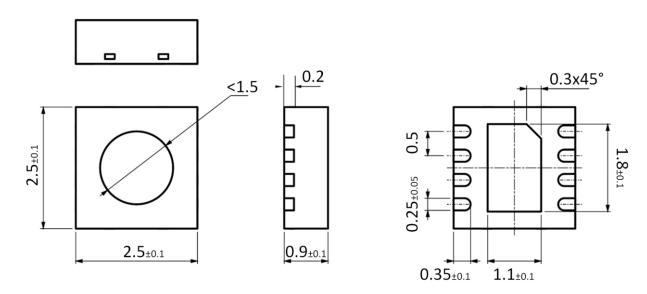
Dimensional drawing of the SHT3x including (units mm).
